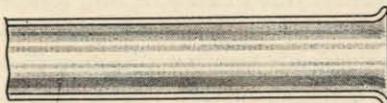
THE END OF ONE TUBE IS SLIGHTLY FLARED WHEN MAKING A T-JOINT
